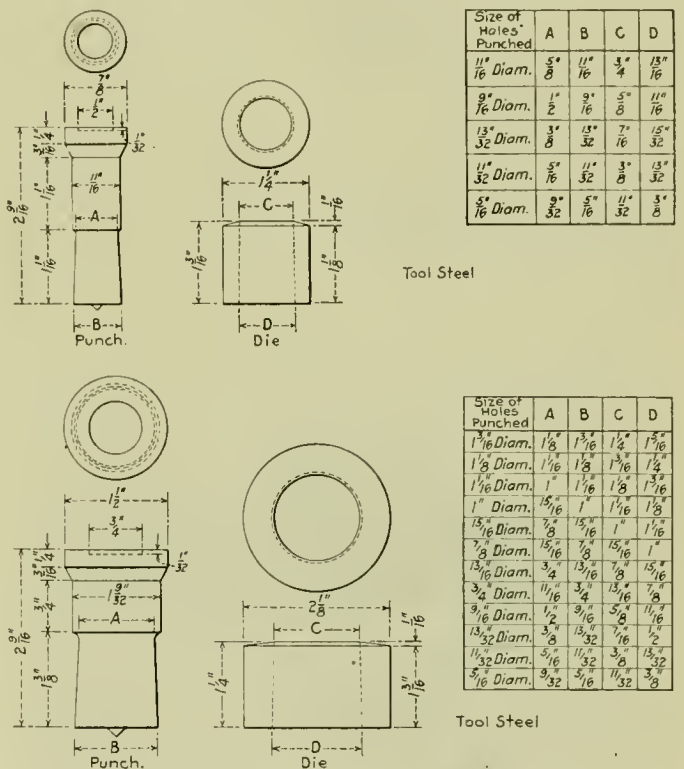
Large and Small Shank Punches and Dies, C. M. & St. P.
